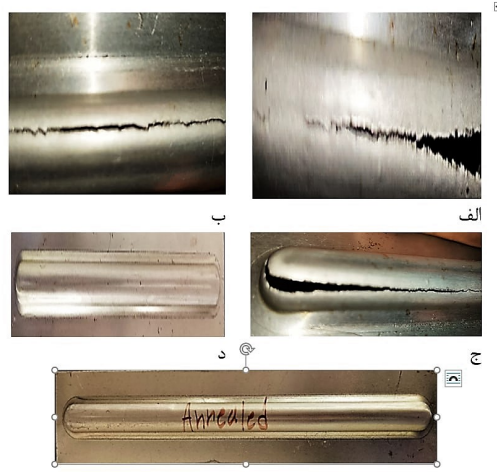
(a) Crack formation in the center of the sheet after 8 mm stretching. (b) Cracking on one side of the sheet. (c) Severe cracking in the right corner after 10 mm stretching. (d) Desired geometry obtained from the unannealed sheet. (e) Desired geometry obtained from the annealed sheet.
